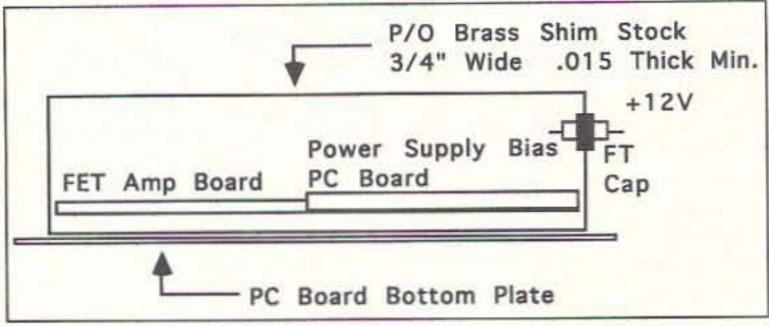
Amplifier container construction. Solder the bottom of the PC boards to brass shim stock sides. Solder amp PC board and bias PC power supply board together. Locate the holes for coaxial connectors for the amp and feedthrough cap for the power supply before soldering the boards together. Use aluminum foil or copper foil for the top of the container.
